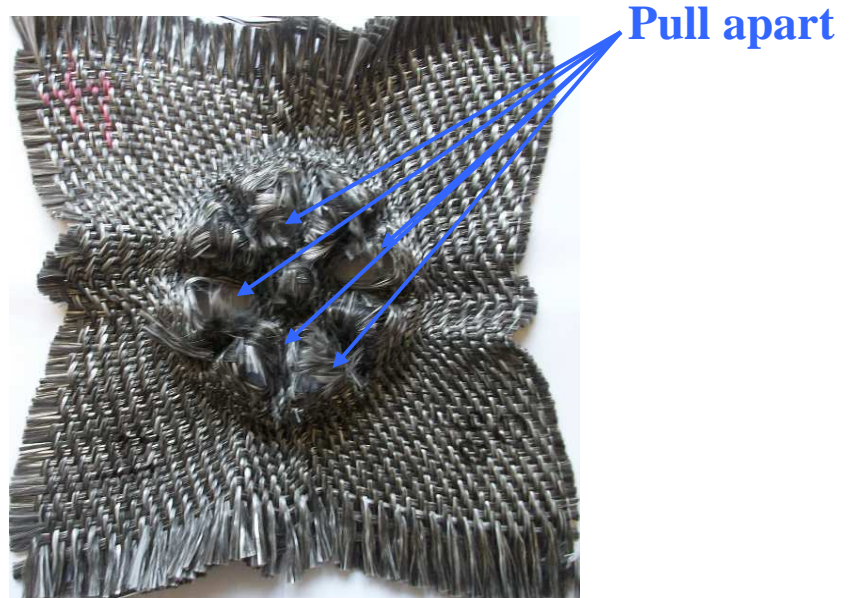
Pull apart of cgPP deformed part using the full punch in a single forming step
